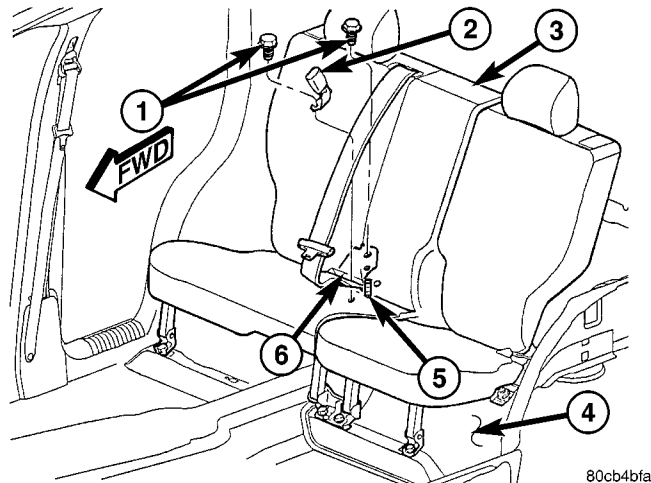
Rear Center Seat Belt Anchor Plate Remove/Install
